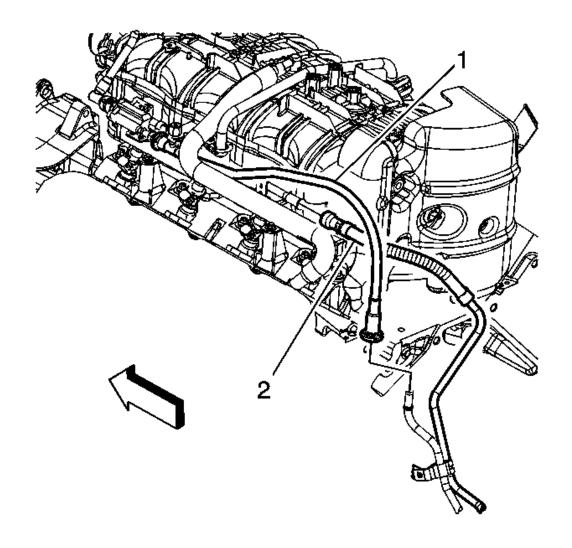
View Of EVAP Canister Purge Tube & Quick Connect Fitting Courtesy of GENERAL MOTORS CORP.
